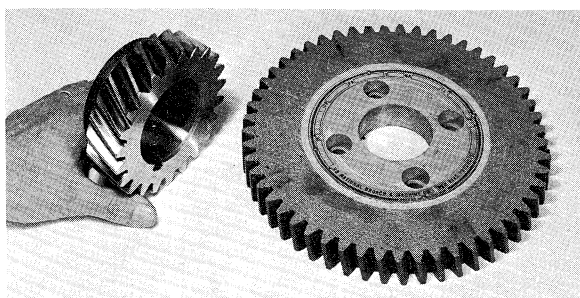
A heavy-duty truck transmission and the tool that honed it to the improvements shown in Fig. 6-62.
